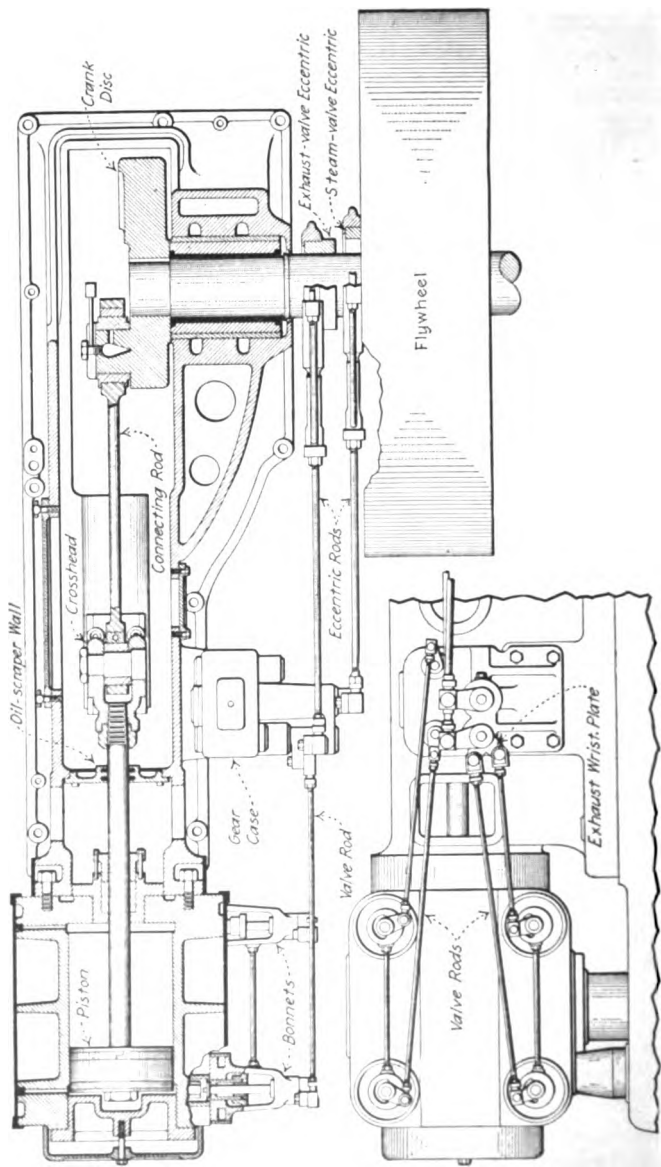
Plan and partial side view of Ridgway four-valve engine showing valve-operating mechanism.
